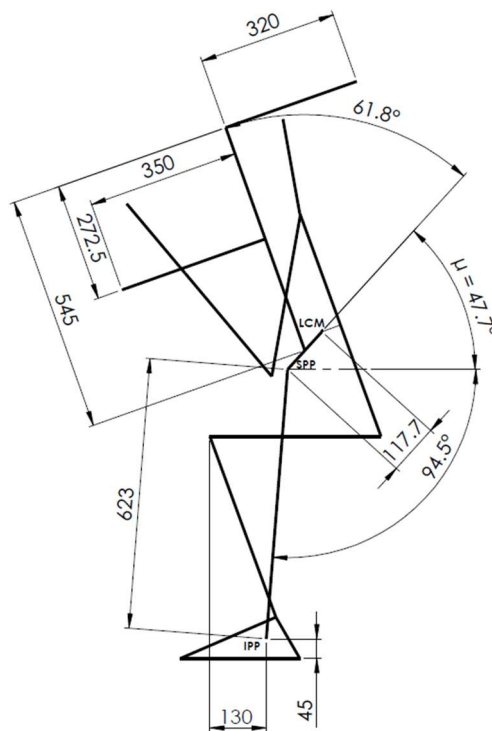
Geometry and Dimensions of Tilting Chest Pad Mechanism
